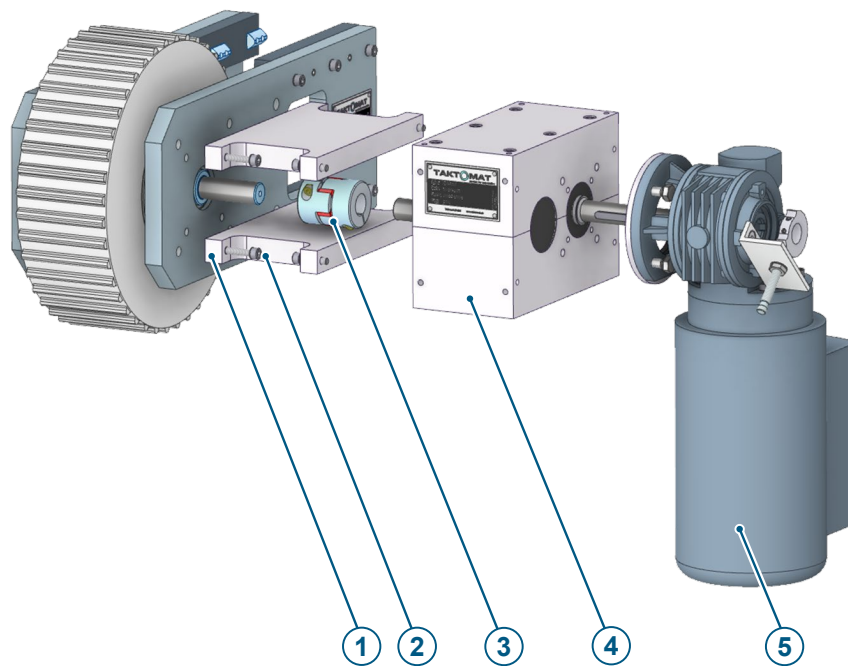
Attachment sequence for the drive (XP flat cam gear, worm gear and motor)
